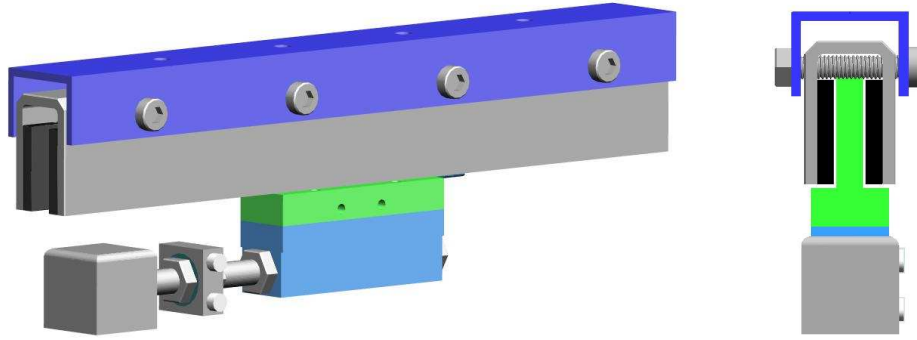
Design of the force measurement setup connected to the linear motor (3D and side view).
